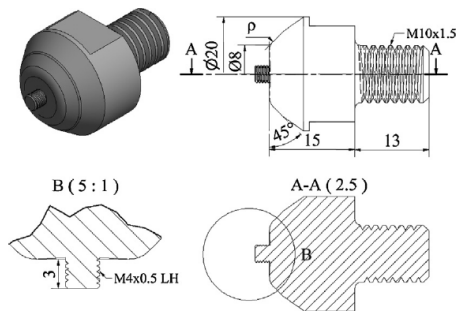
Geometry of the tool used for post-processing MIG welded plates (dimensions in mm).
